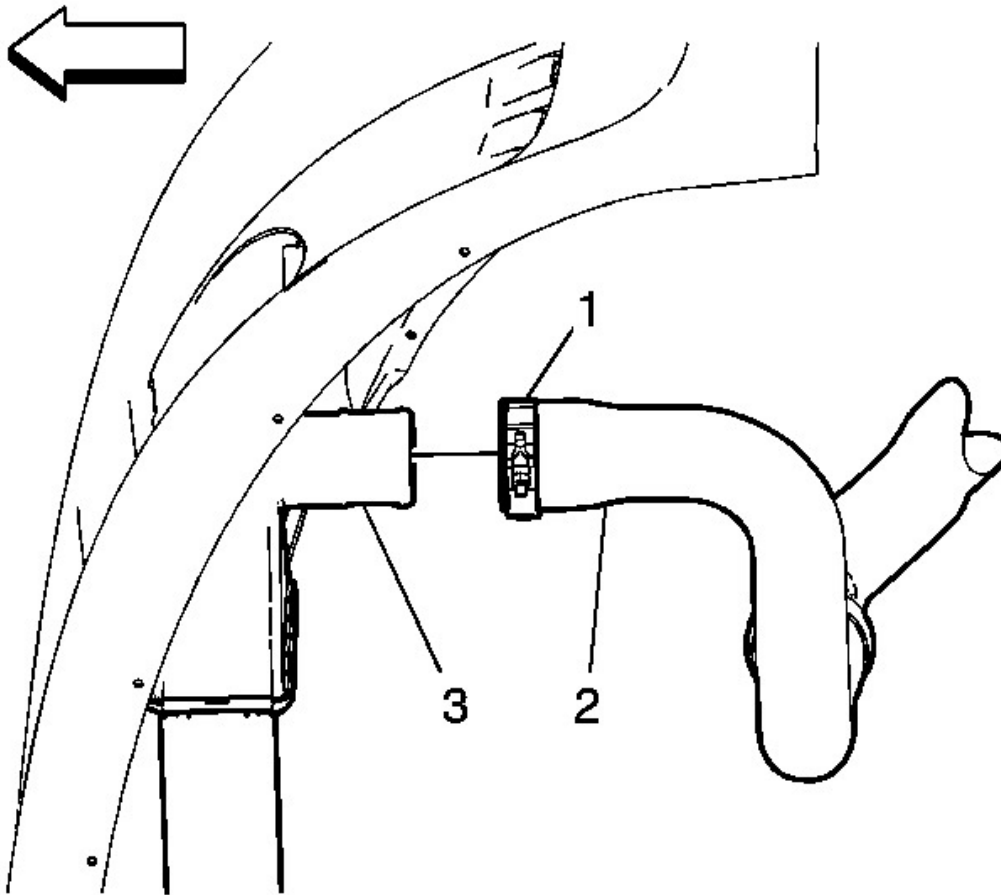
View Of Charge Air Cooler Inlet Pipe
